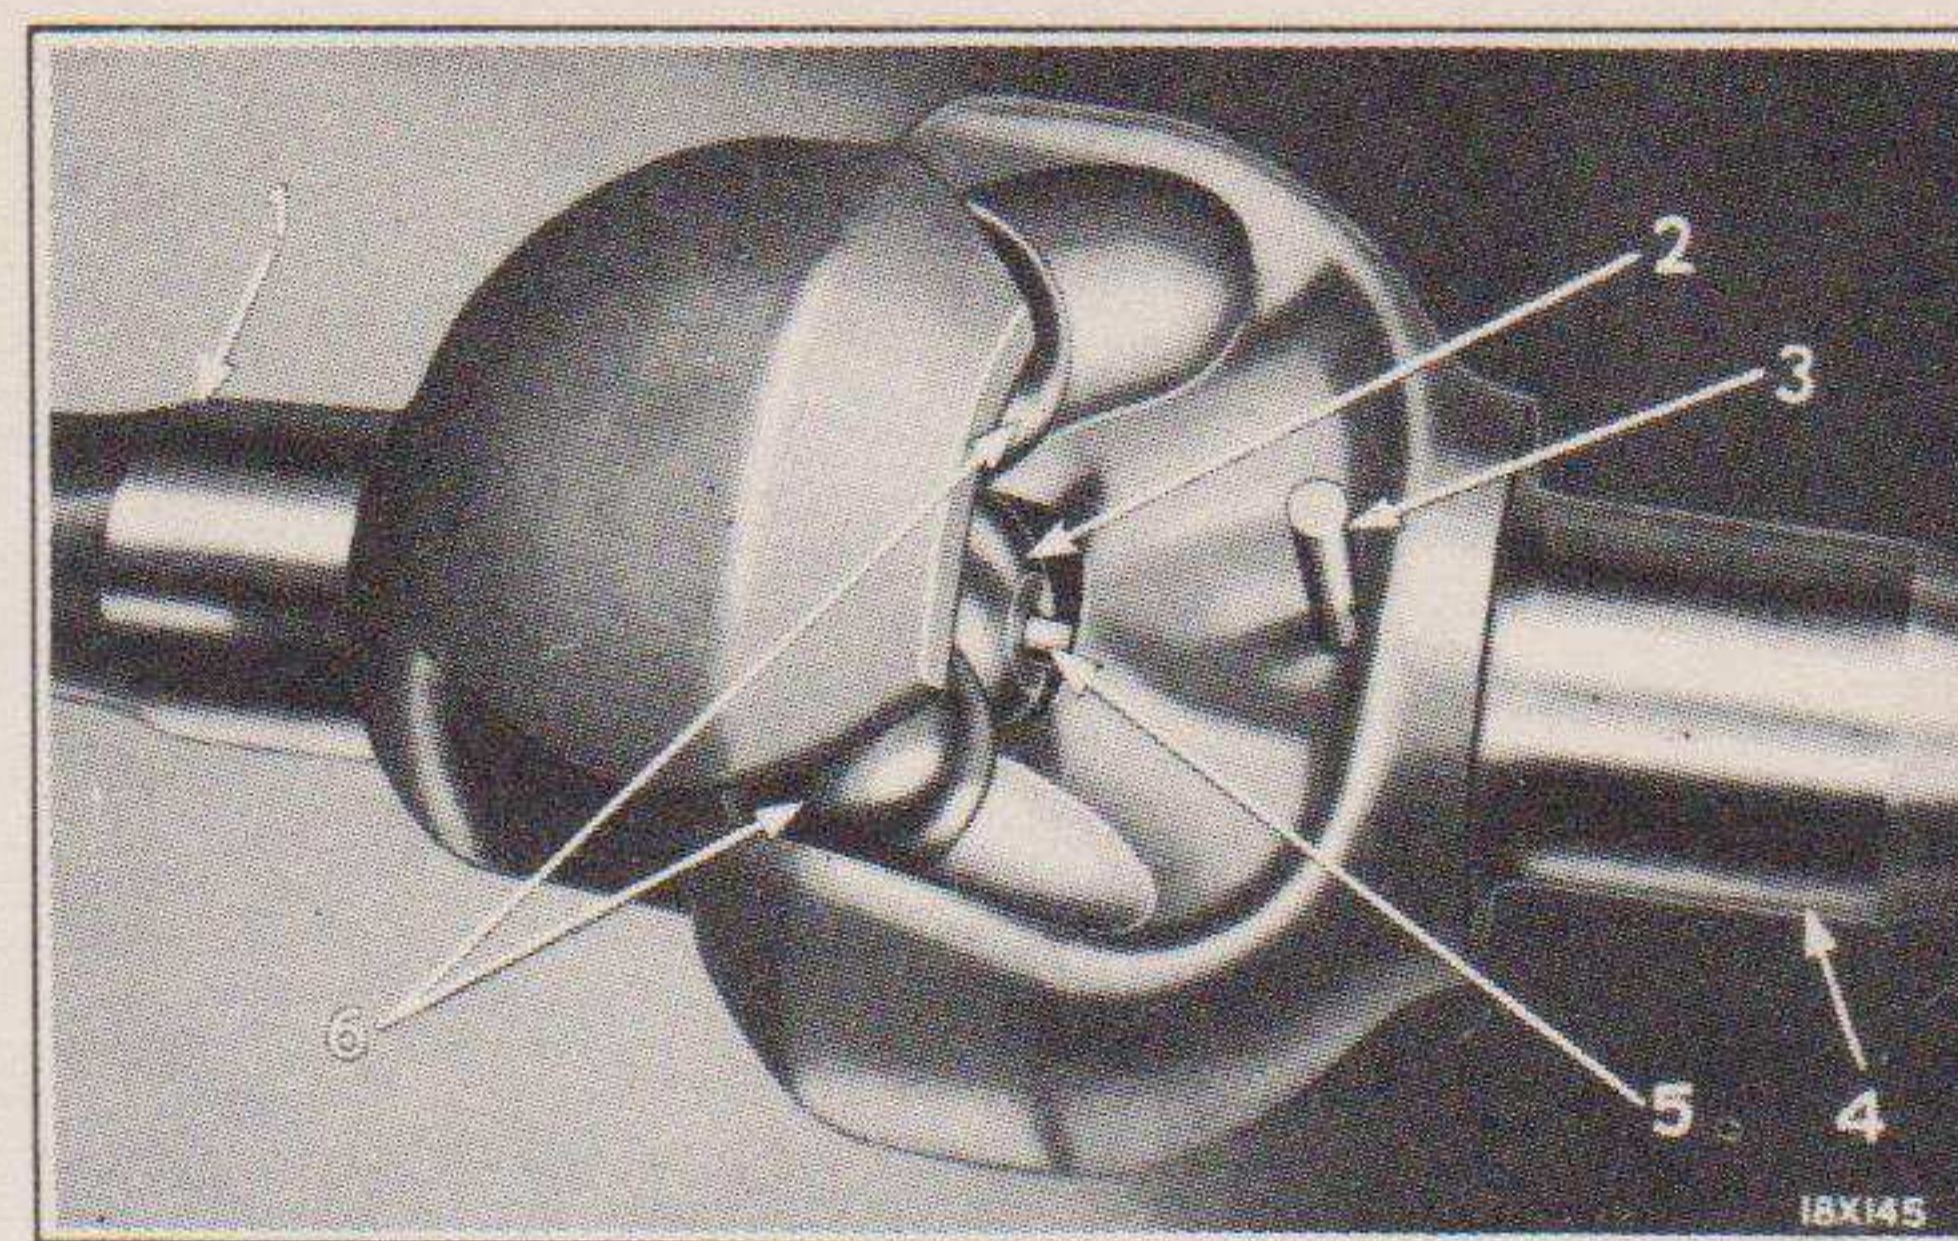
Installing Universal Drive Center Ball Pin Retainer Pin (Bendix-Weiss)
